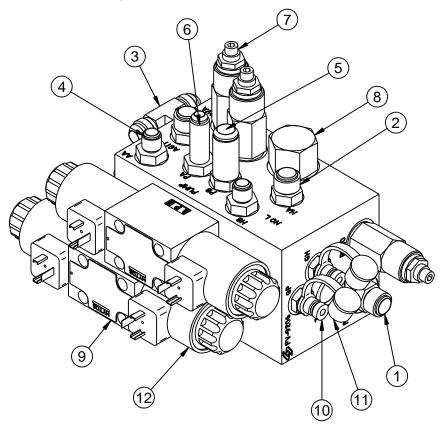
Hydraulic Valve Assembly PN 45433
